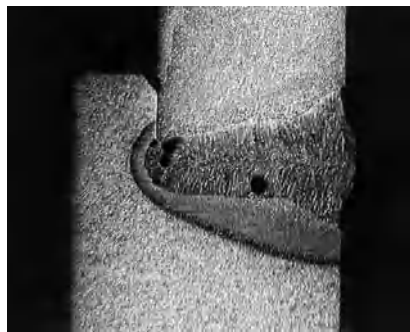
Micrographic section of a laser welded housing (in 3 mm mild steel) onto a clutch (in 16 Mn Cr 5) for an automatic gear box
